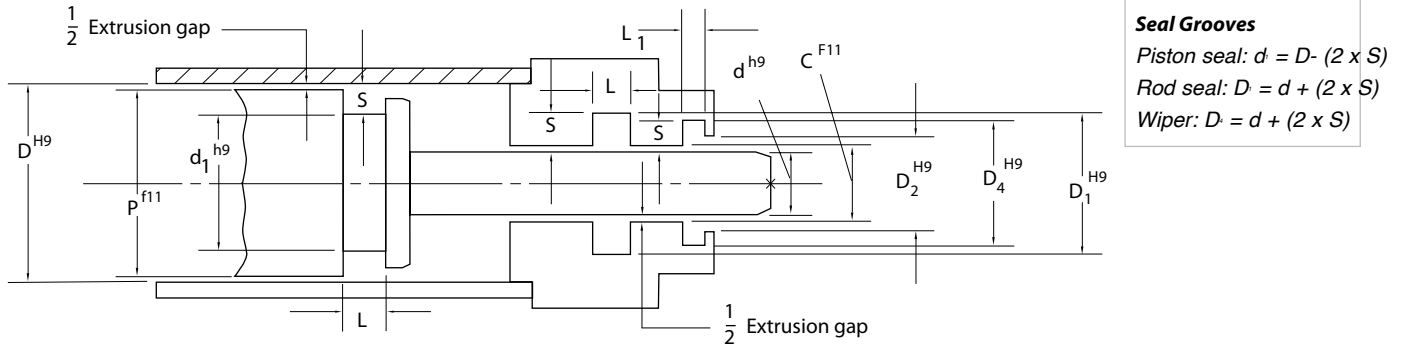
the examples below illustrate how fits and tolerances can be applied to dimensioning one or more components of the cylinder shown in Figure 1 for metric and inch sizes.
